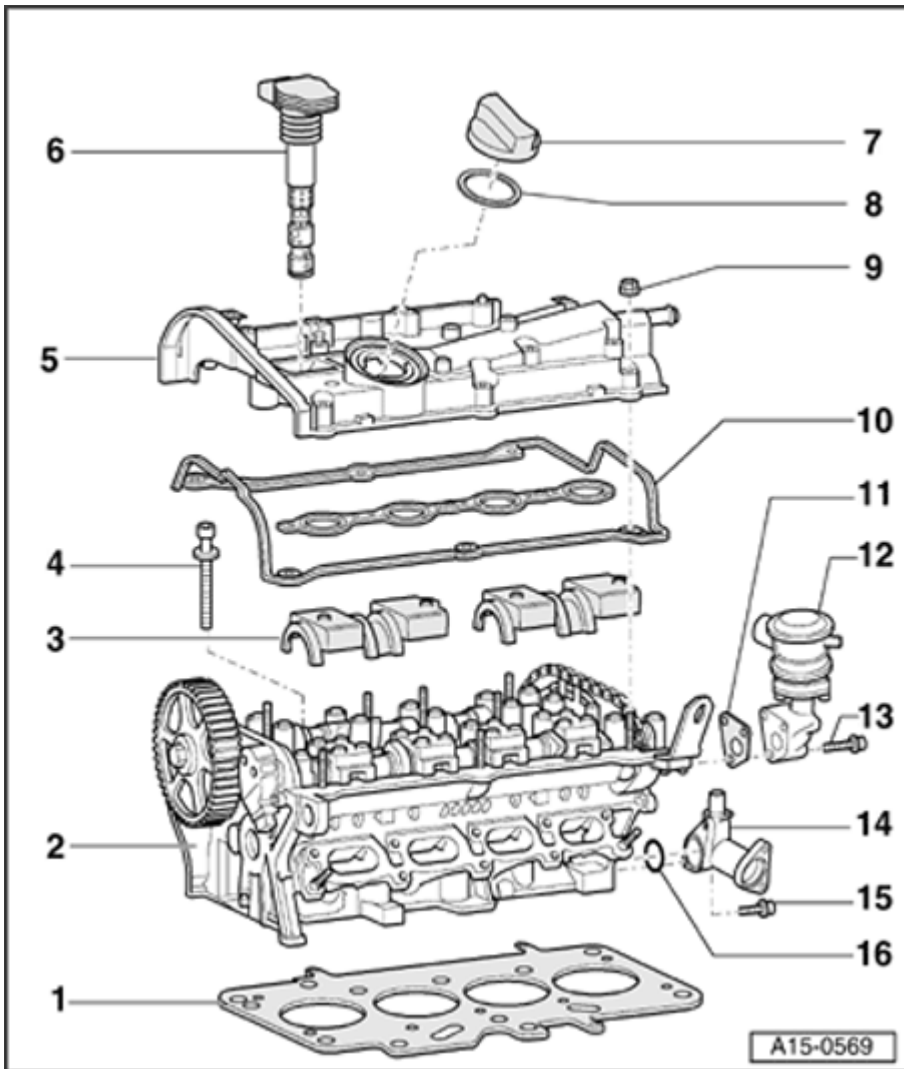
Cylinder Head, Removing And Installing Overview - Part I
